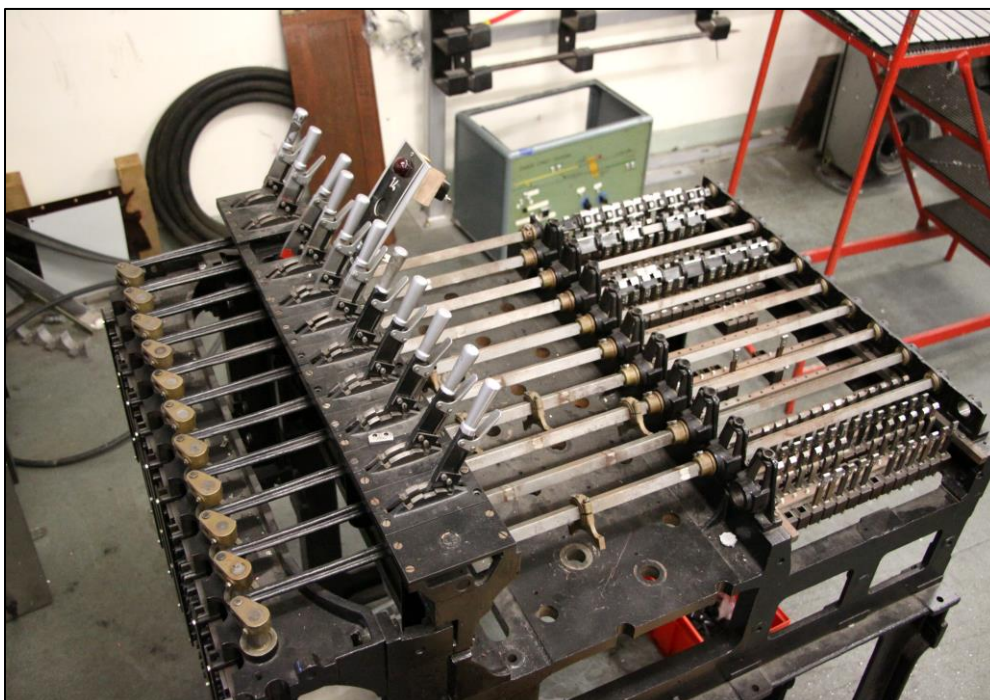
The guts of a single, 11 lever section of the Style B frame, showing it with the covers removed. This photo shows the main internal features of the frame but with the electric lever locks taken out. The names of the parts are shown in Figure 1 above. Photo by Tom Crame.
